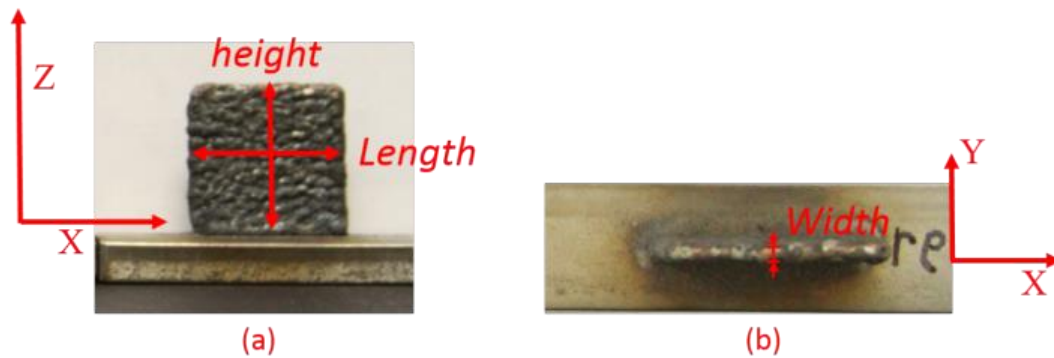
Example of part length, width, and height measurement: (a) Front view of the part showing the positions of height and length measurements; (b) Top view of the part showing the position of the width measurement.
